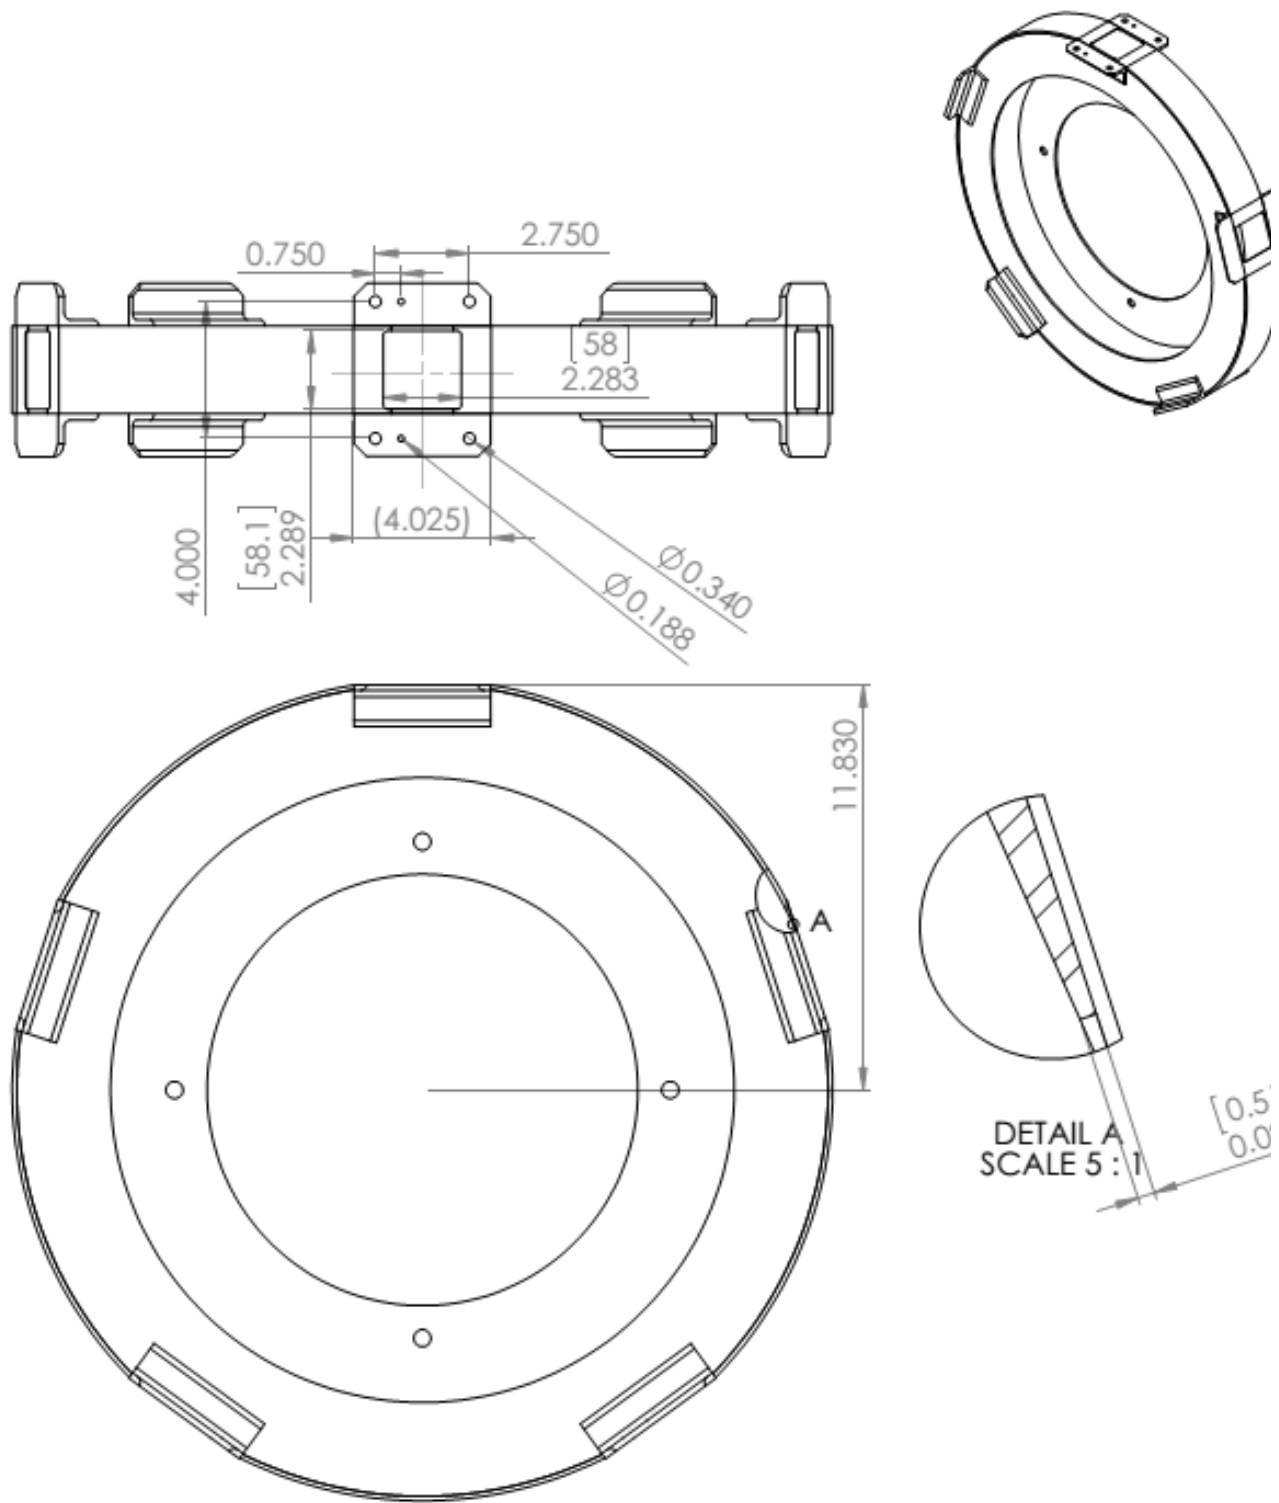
Detailed Dimensions of the Toroid Wheel D with the Cuts
